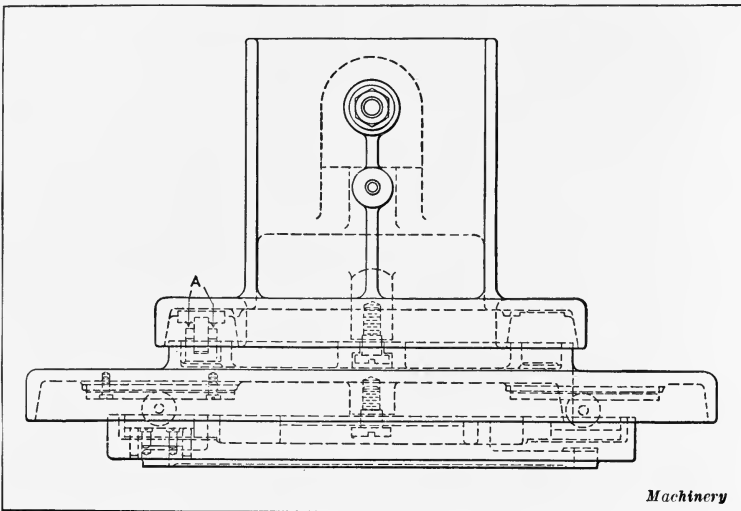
Drawing of Tapping Fixture illustrated in Fig. 40, equipped with Trunnioned Roller Bearings
